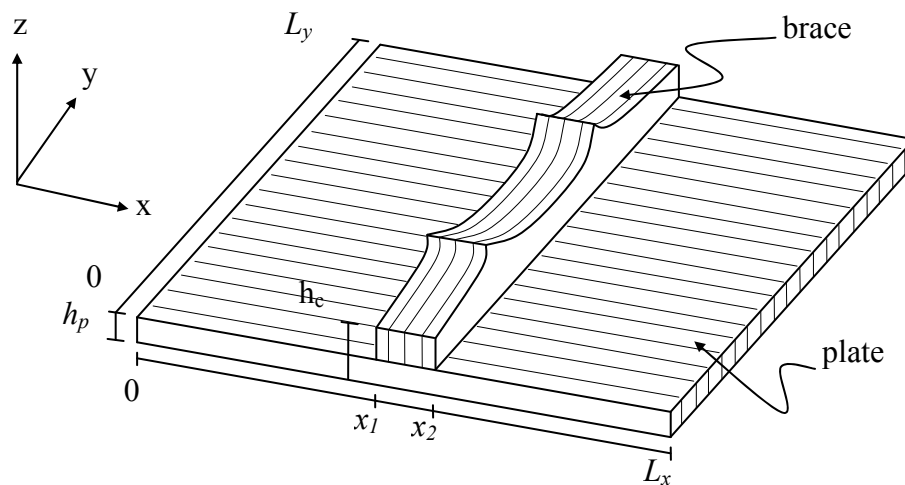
Orthotropic plate reinforced by a scalloped brace.
